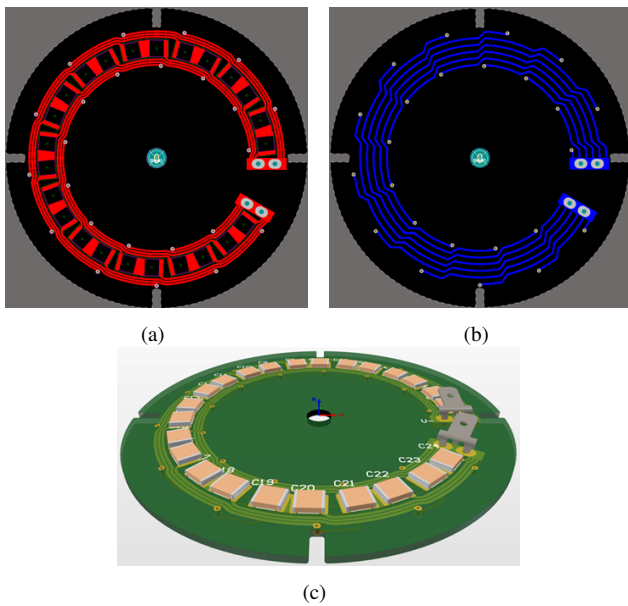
Individual PCB track routing: (a) top layer, (b) bottom layer, (c) PCB perspective.
